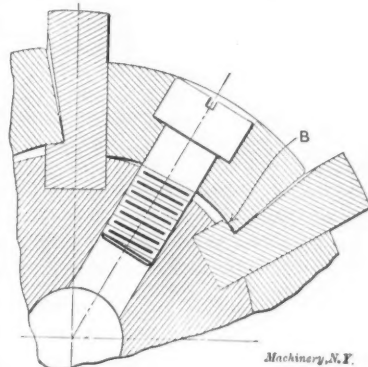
Method of Binding the Blades in Tap, Fig. 8.
